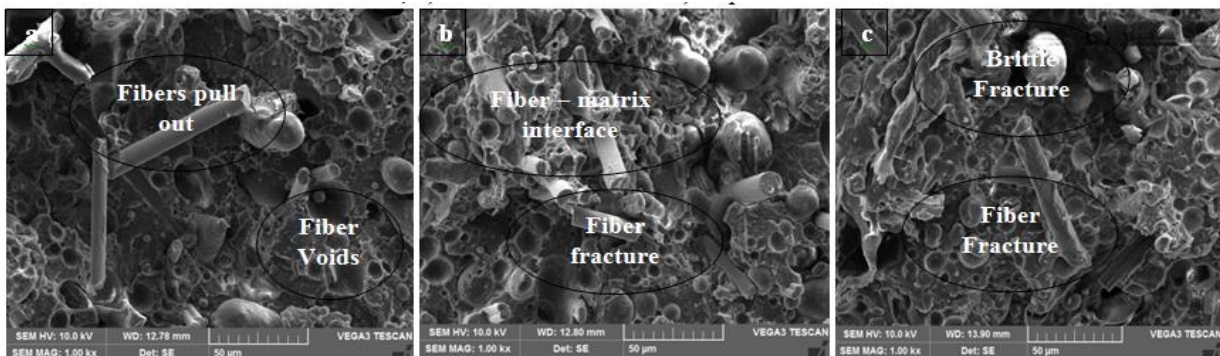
SEM photographs of fractured surface of 10wt. % SGF and 10wt. % SCF filled 80/20 wt. % PA66/PTFE blend :a) Tensile fracture, b) Flexural fracture and c) Impact fracture
